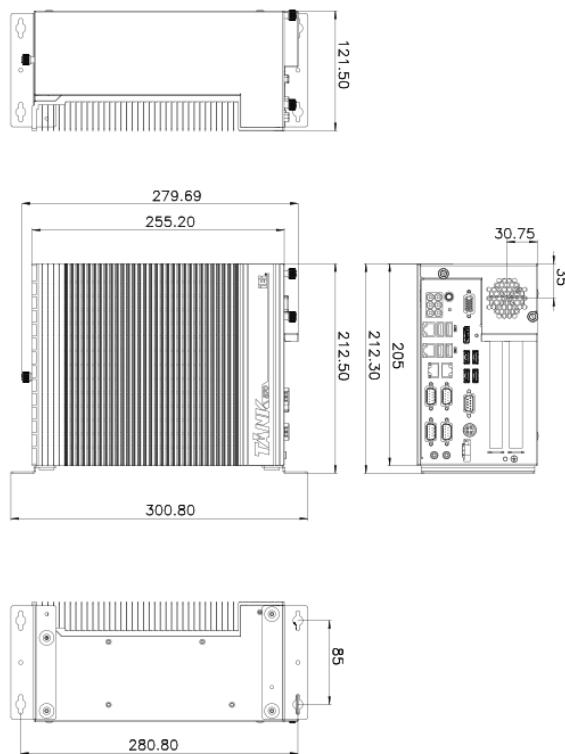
TANK-870-Q170-2 slot Physical Dimensions (millimeters)
